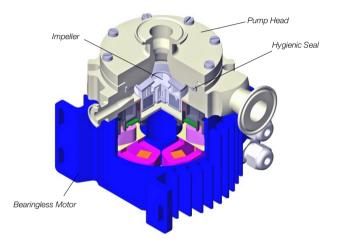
Cross-section of the bearingless pump motor and pump head (Concept with pump head LPP-600.7 (PVDF/PFA))
